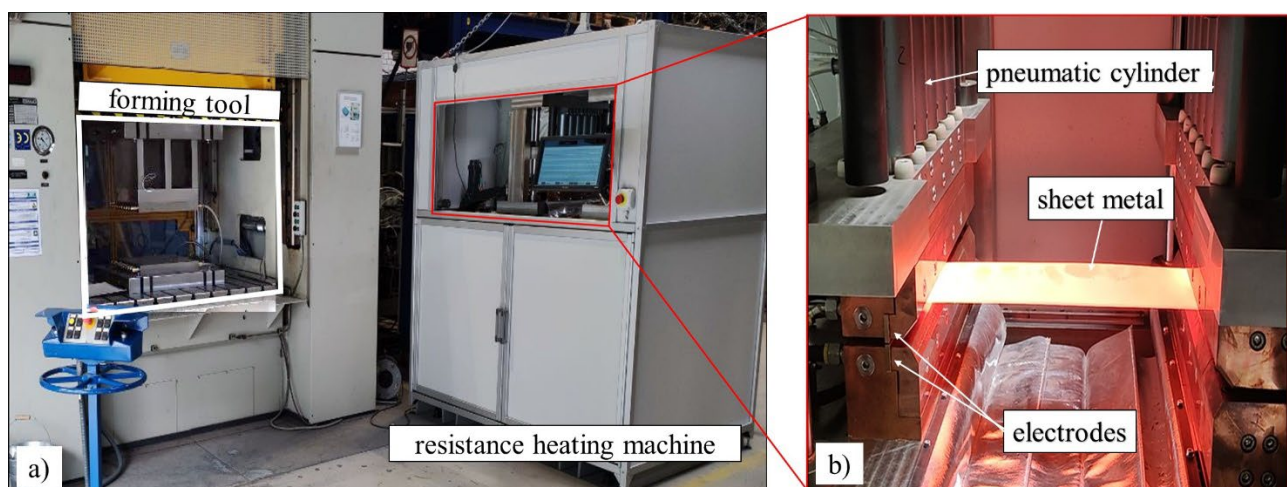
a) Experimental setup for hot stamping, b) Detailed view of the DC resistance-heating system with a heated blank
